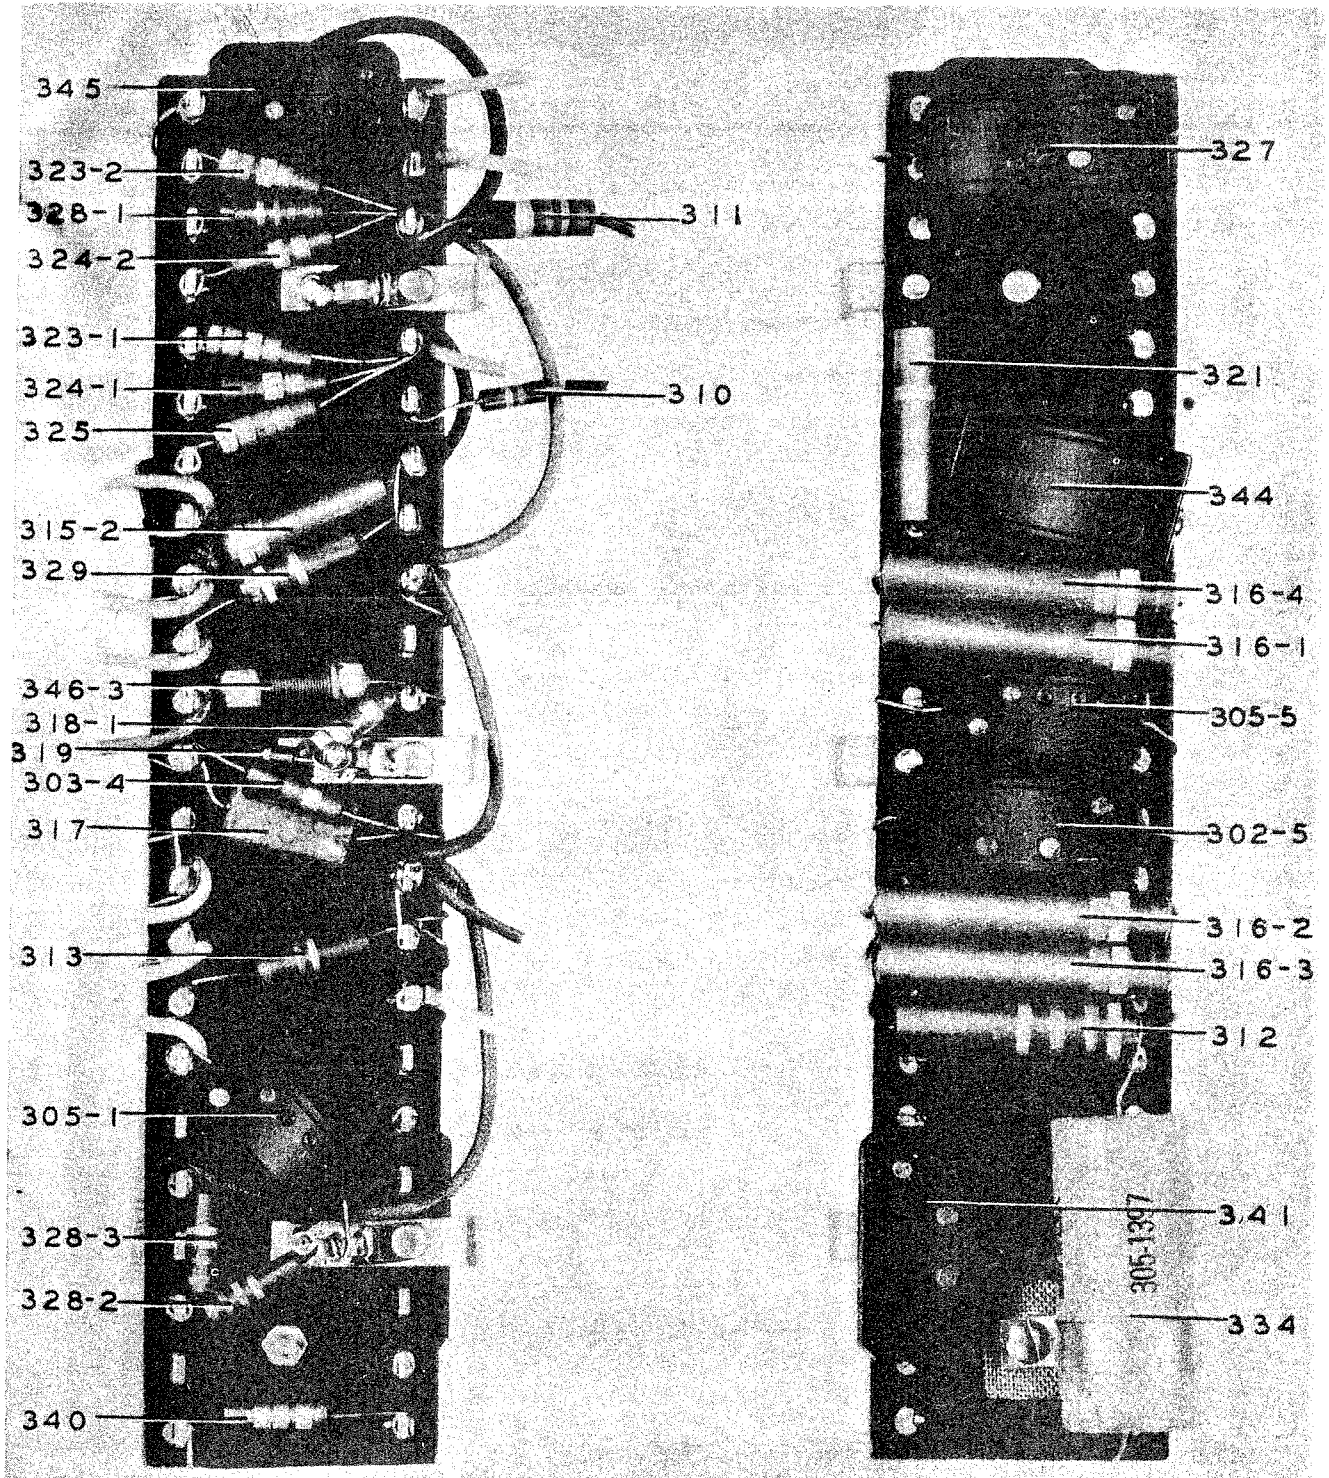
Indicator BC-929-A—Chassis, Components Mounted on Each Side of Long Wiring Panel
